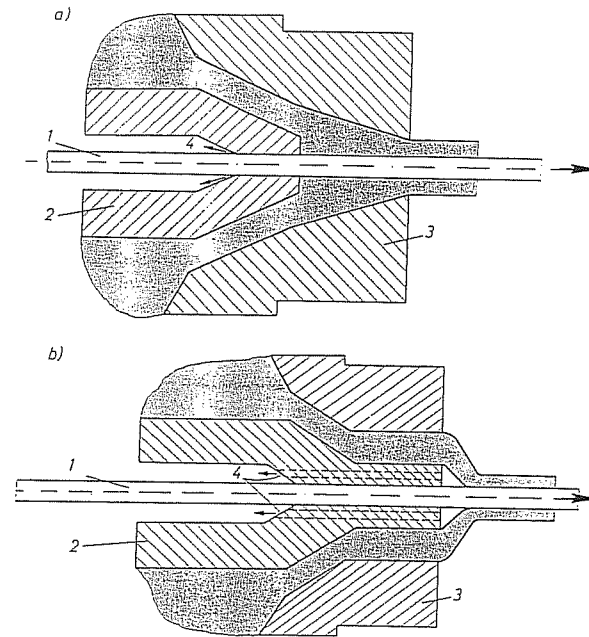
Wire coating dies, a) for pressure coating (top), b) for tube coating (bottom), 1 Wire, 2 Torpedo, 3 Die body, 4 Vacuum (if necessary)
